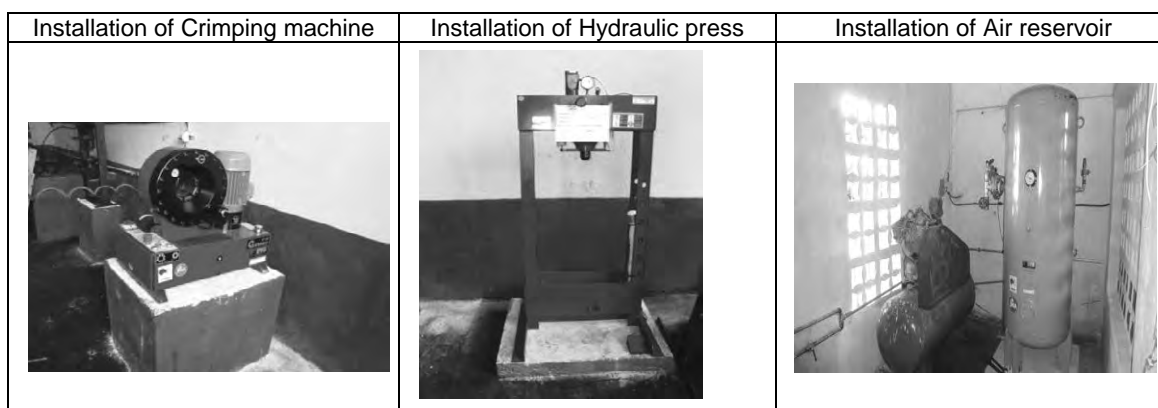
Installation of Crimping Machine, Hydraulic Press, and Air Reservoir
